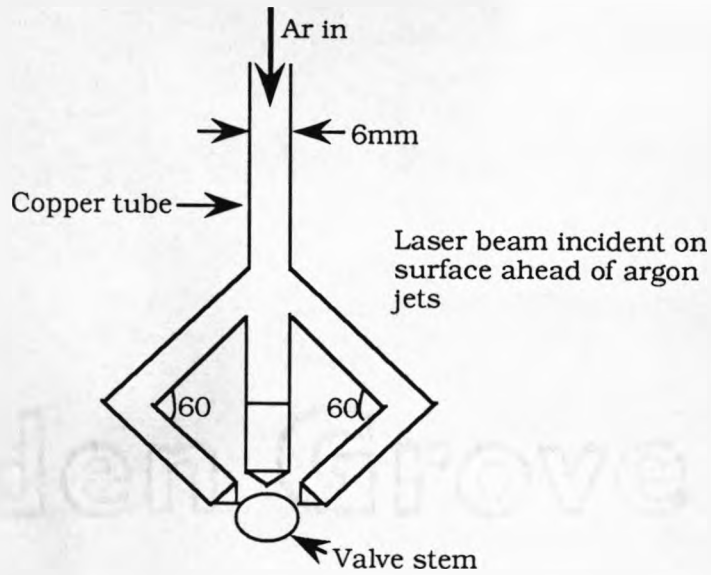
Argon cooling assist device designed for valve stem hardening
